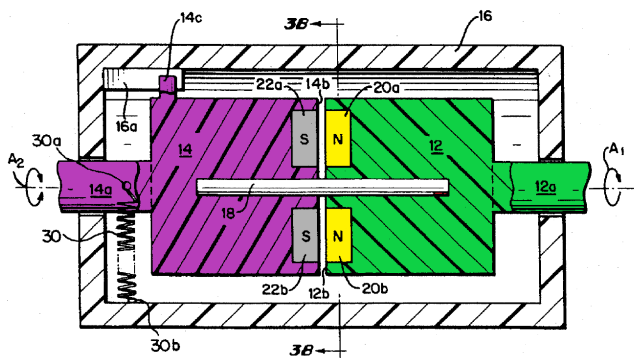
Schematic cross section of the magnetic transmission mechanism. Relevant Components: 12a = drive shaft extending from the motor, 12 = driving magnet holder, 14 = driven magnet holder, 14a = driven shaft connected to the cutter. 14c = pin extending from driven magnet holder, 16a = stop inside the housing, 16 = housing, 18 = stabilizing shaft, (20a & 20b)= driving magnets, (22a & 22b)= driven magnets, 30 = return spring, A1 = rotation direction of the engine, A2 = the reciprocating movement direction of the cutter. Adapted from: [85]
